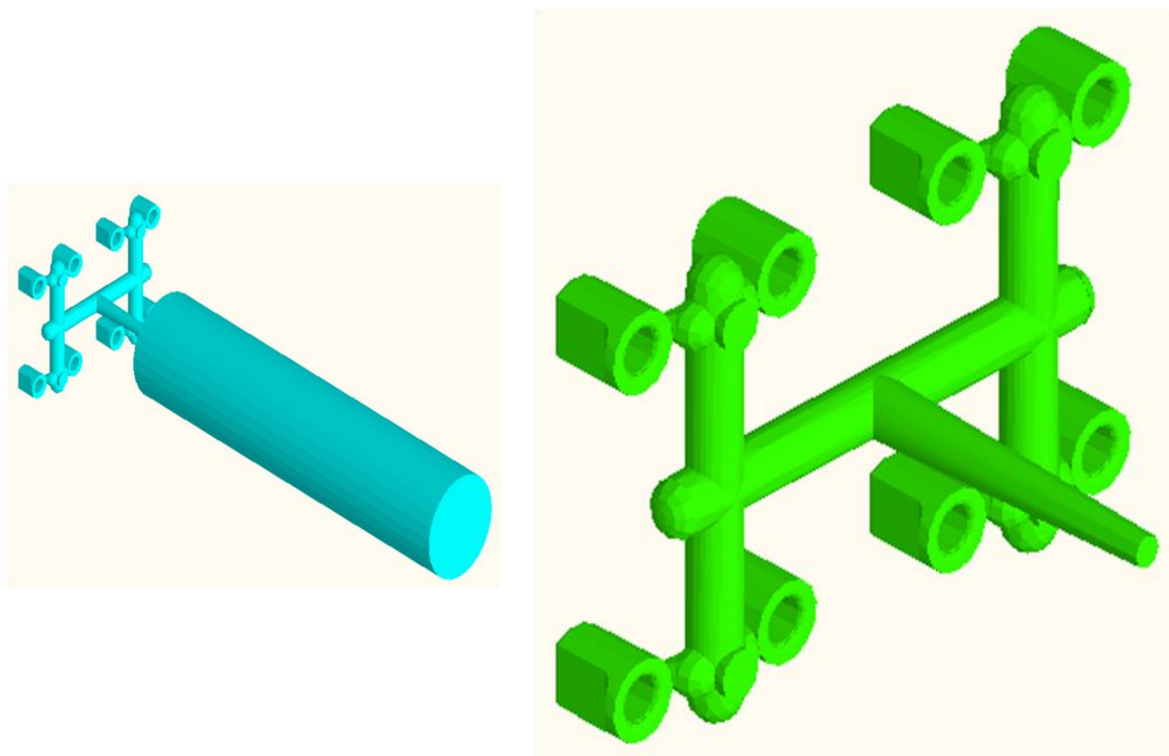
The model of the gating system of the multicavity mold for injection molding.
